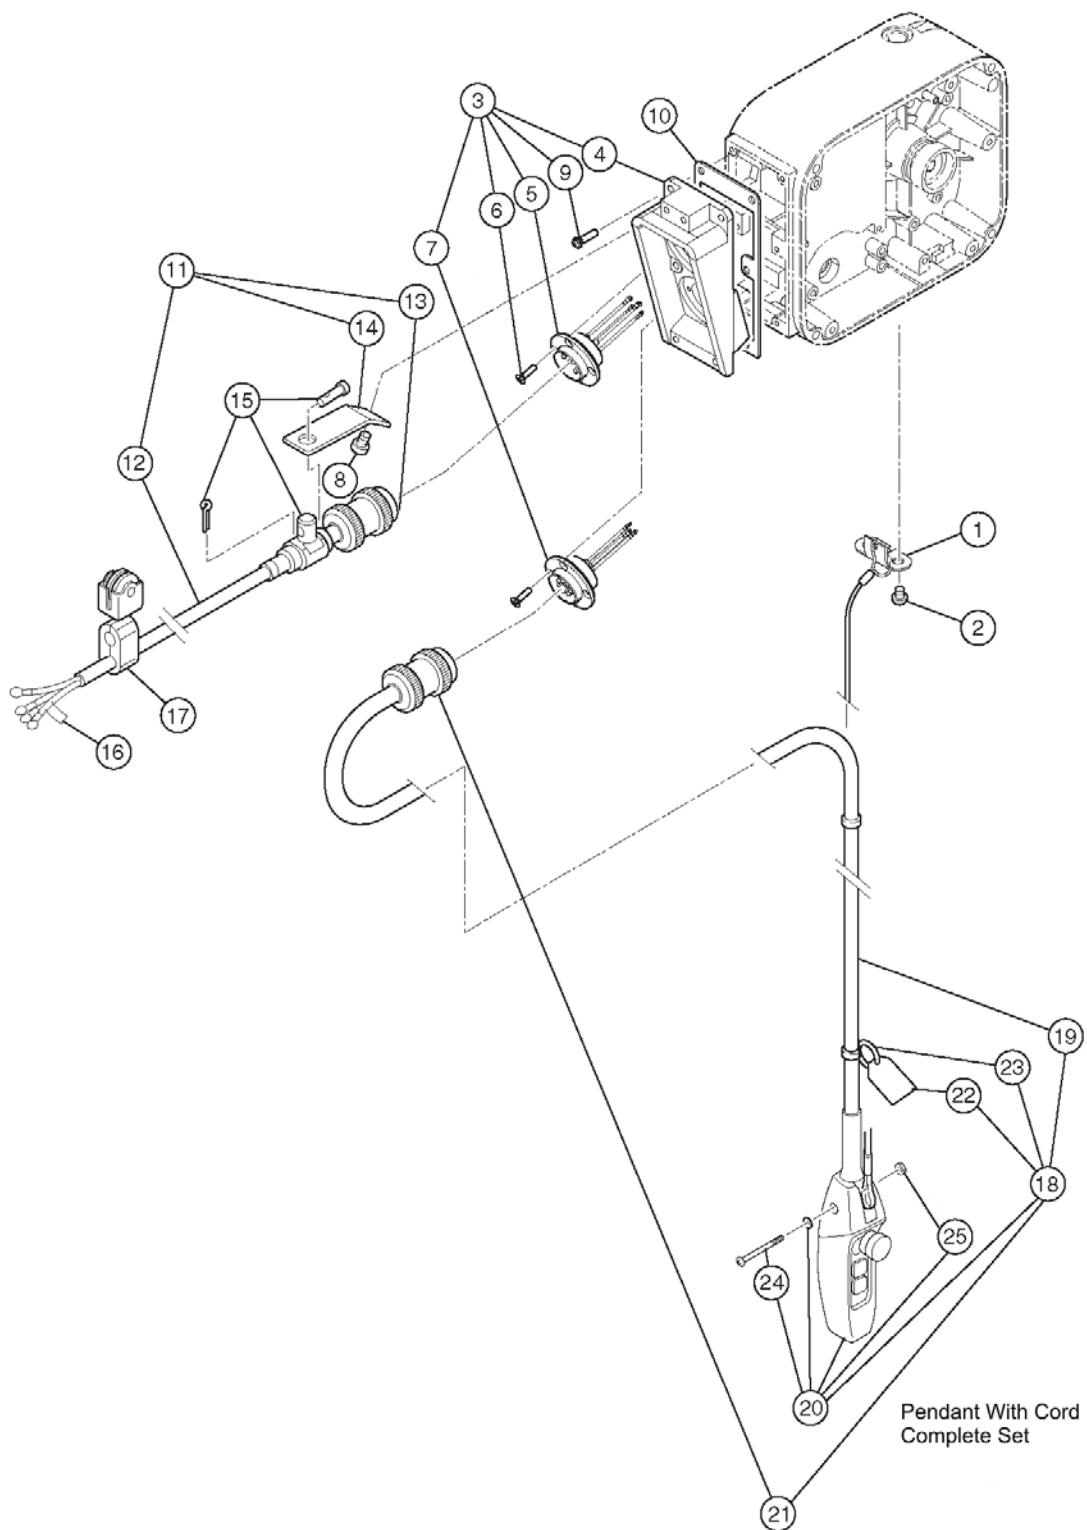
Power Supply and Pendant Parts (Plug Connection)
